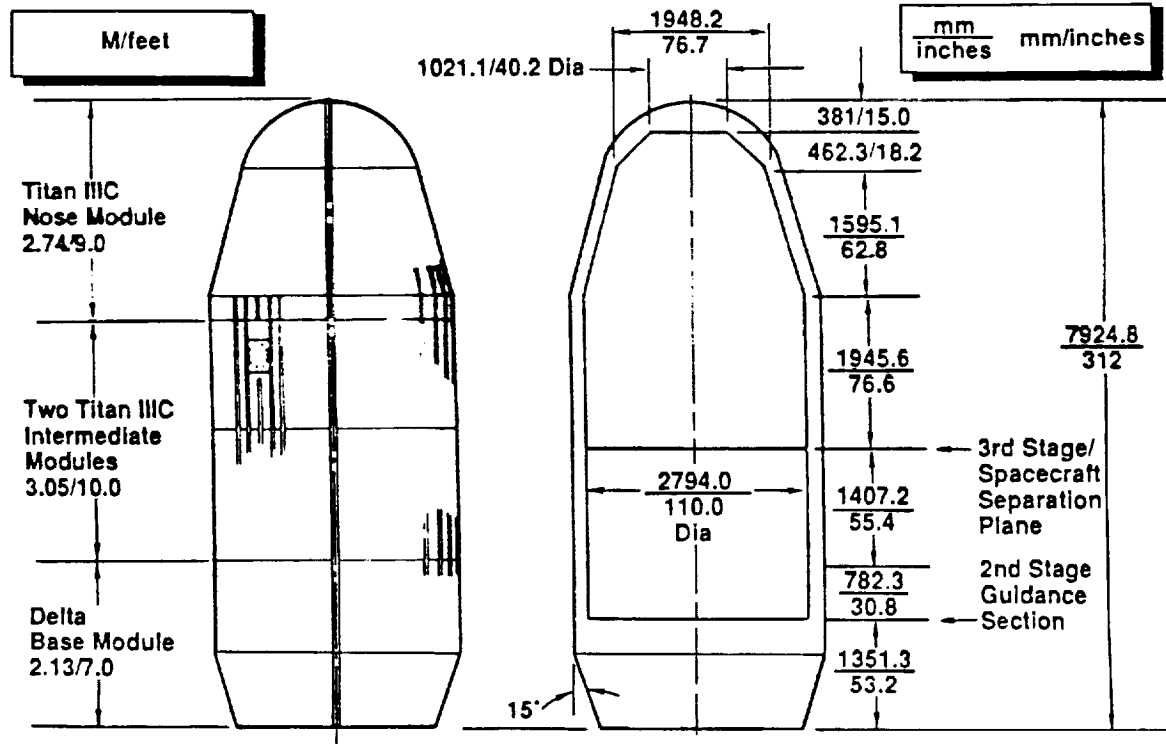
Delta 2 Fairing Dimensions (10 ft diameter)
